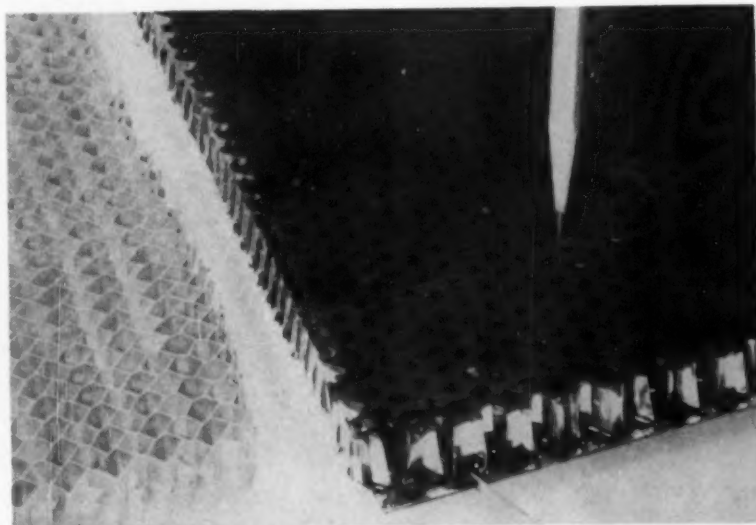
With one facing removed, honeycomb panel (right) exposes large bonding area with excellent filleting.
